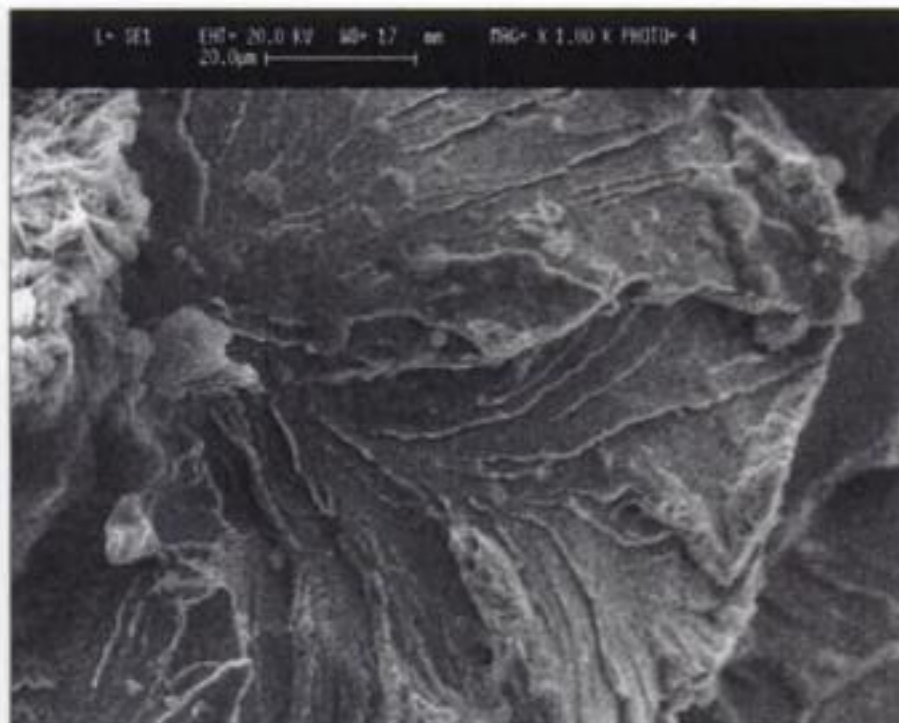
“River Pattern” of a cleavage fracture present in the fracture head 2A.
